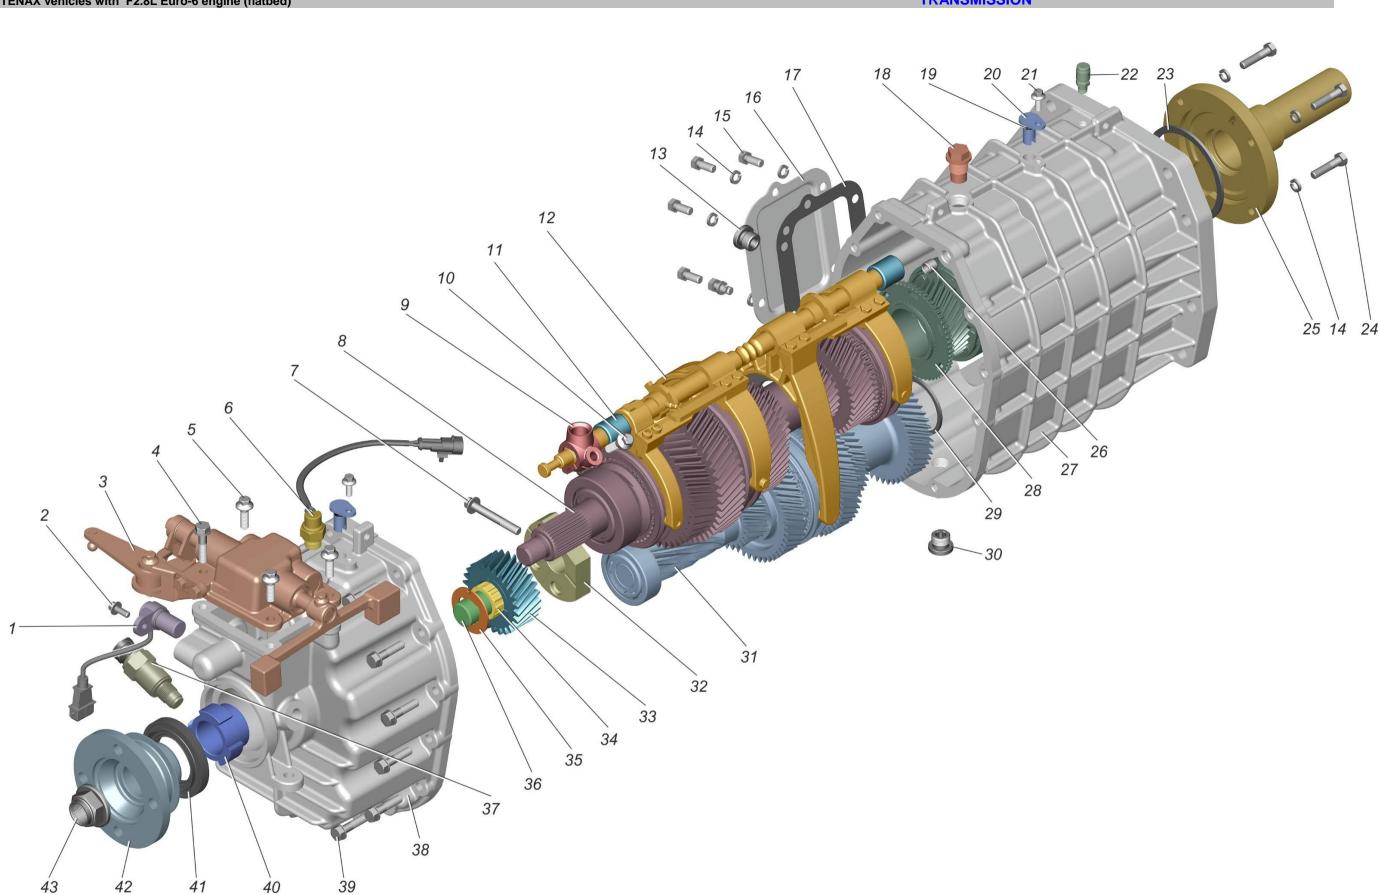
Gearbox structure: $1 - neutral (phase)^{1}$ sensor; 2, 4, 5, 7, 10, 15, 21, 24 - bolts; 3 - control linkage cover assembly; <math>6 - reverse light switch; 8 - secondary shaft assembly; <math>9 - engagement stem head; 11 - linear motion ball bearing; 12 - gear-shift mechanism; 13 - oil filler plug; 14 - washer; 16 - cover plate; 17 - cover plate gasket; 18 - retainer; 19 - sealing ring; 20 - stop dog; 22 - breather; 23, 29 - adjustment rings; 25 - primary shaft bearing cover with collar seal; 26 - centering pin; 27 - front gearbox housing; 28 - primary shaft assembly; 30 - magnetic plug; 31 - countershaft assembly; 32 - axis bushing; 33 - reverse idler gear; 34 - radial roller bearing without rings; 35 - reverse gear thrust washer; 36 - reverse idler gear axis; 37 - speed (pulse) sensor; 38 - rear gearbox housing, 39 - flange bolts; 40 - speed sensor rotor; 41 - collar seal; 42 - secondary shaft flange; 43 - flange mounting nut.
